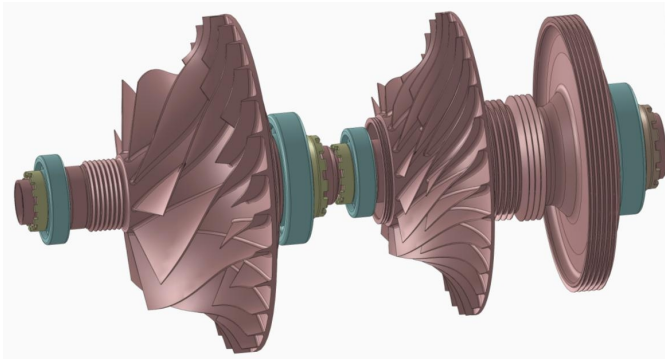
Experimental rotor of two-stage centrifugal compressor
